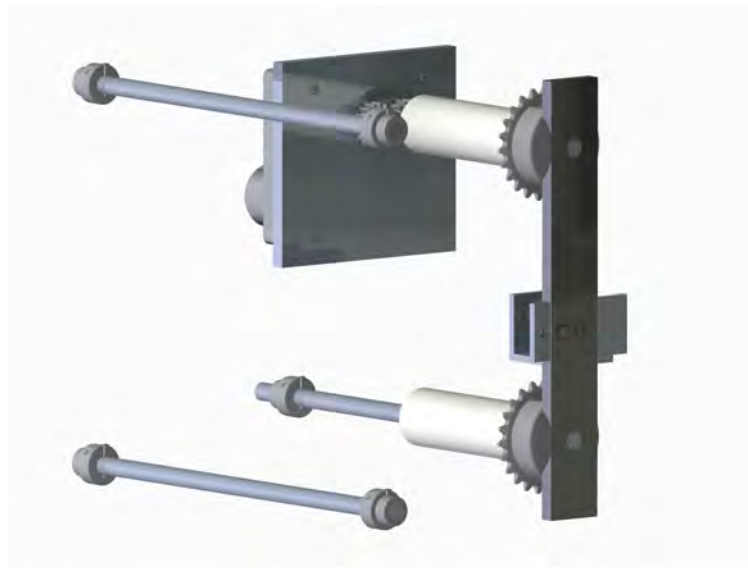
CREO Parametric model of Mylar Scrolling Mechanism.
